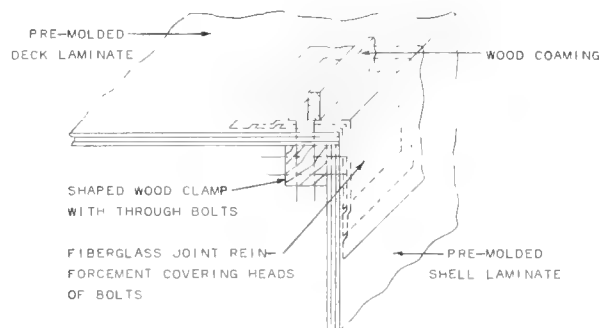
Deck Edge Connection - Shaped Wood Gunwale Clamp
